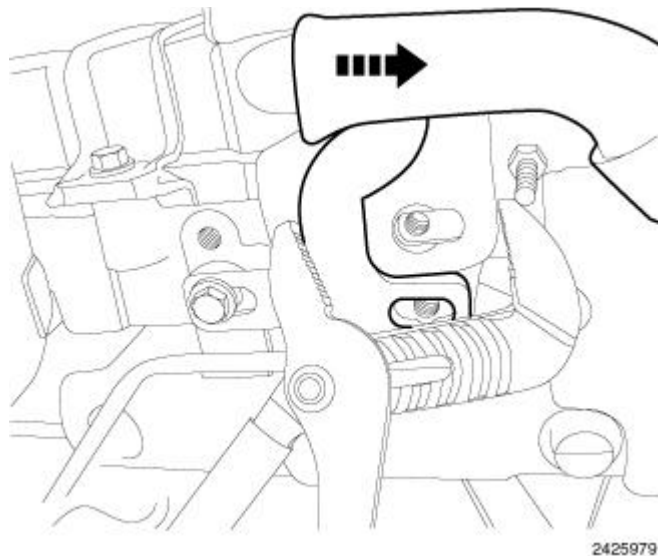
Using Channel Lock Pliers To Separate Top Connection Of Front Coolant Tube From EGR Cooler
